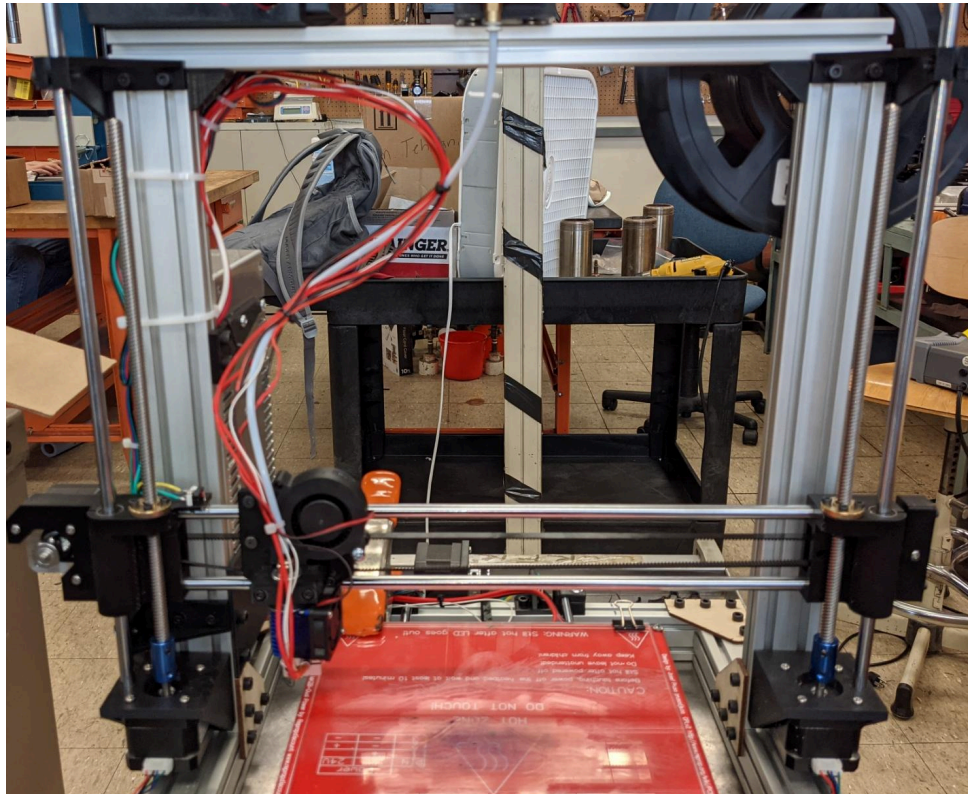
shows the Y-axis that contains the belt, motor, and heat bed frame. The heat bed frame was constructed using aluminum extrusions and secured with corner pieces that were 3D printed.
